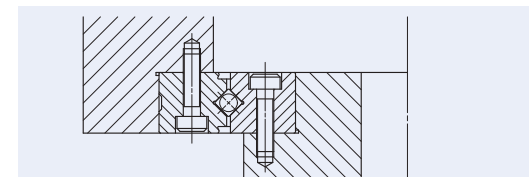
Example of mounting to the housing of Mounting Holed Type High Rigidity Crossed Roller Bearings V
